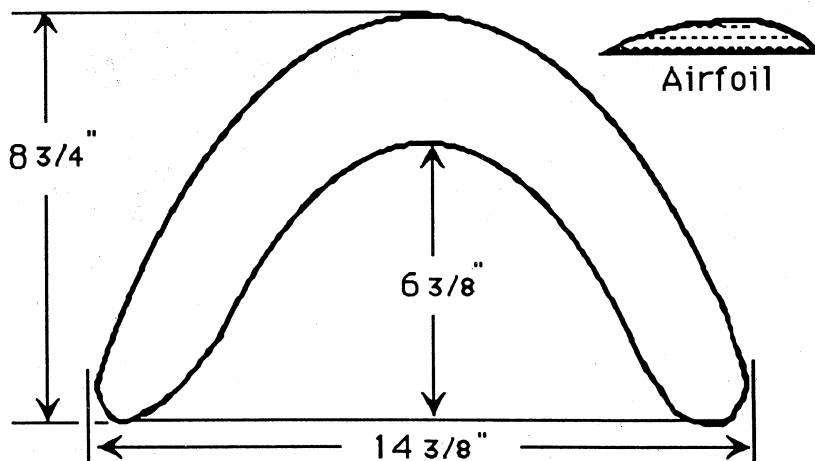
Kangaroo Boomerang by Melvin Wallace
